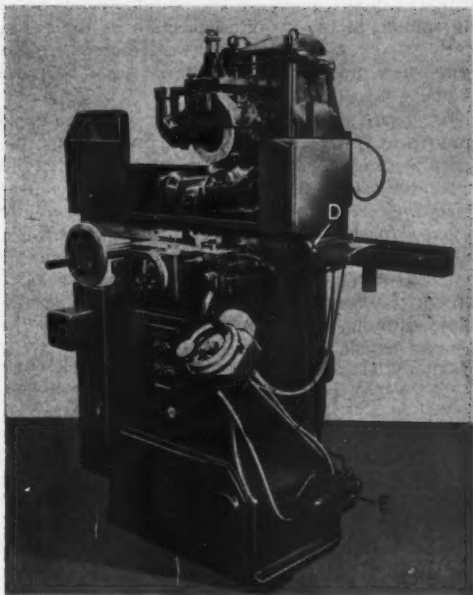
Jones & Shipman type 540 surface grinder equipped with an automatic head for grinding shaping cutters for helical gears
